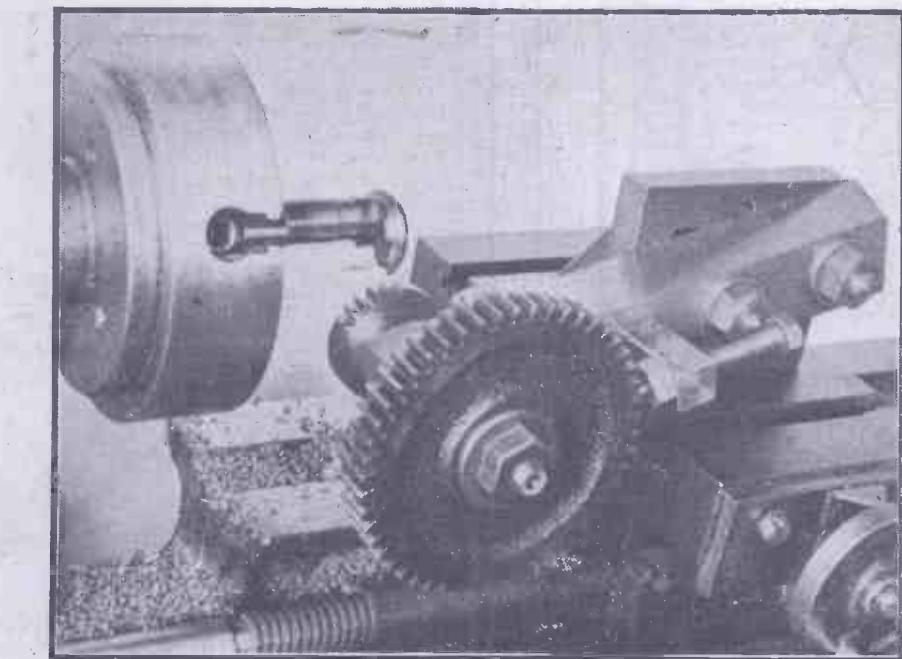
Gear-cutting set-up in operation, showing 25-toothed wheel being cut, indexed by the lathe's own 50-toothed wheel.
